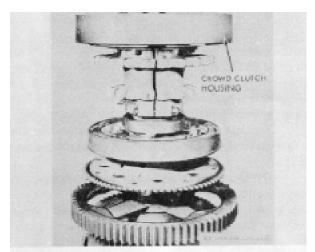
Front drum shaft assembly fright side (sheet 2 of 2) Figure 4-17. Front drum shaft assembly (right side) (sheet 2 of 2).
